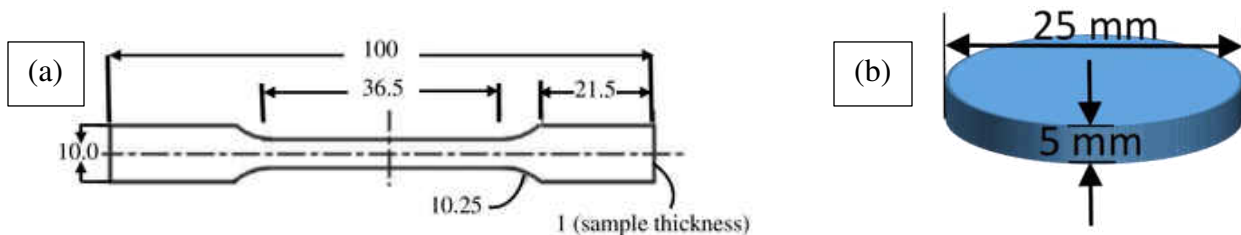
Sample dimensions for 3D printed testing coupons (a) tensile test coupon (dimensions in mm) (b) cylindrical test coupon [43]
